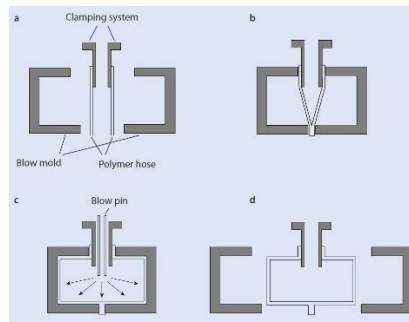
Process steps during blow moulding hollow objects. (a) Introducing the preform into the form and onto the mandrel. (b) Form closure. (c) Inflation of the preform to the final form. (d) Opening the blowing mould and demoulding [3]
